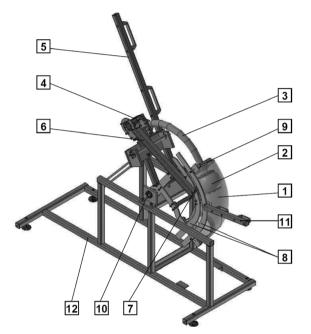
A 3D model of the moulding unit: 1 – pipeline element (elbow), 2 – moulding core, 3 –moulding core support, 4 –moulding core drive shaft, 5 – manual lever for operating the motion of the core, 6 – guiding roll arm, 7 – guiding roll, 8 – contour master, 9 – pipe element bracket, 10 – turning axis of the elbow unit and moulding core unit, 11 – manual lever for operational motion of the elbow unit, 12 – load-bearing structure
